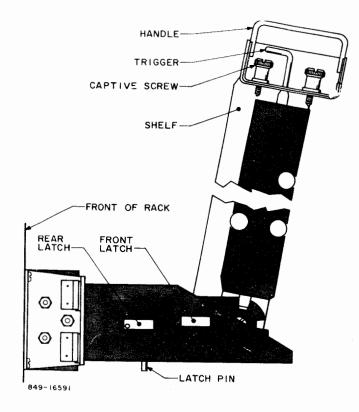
Side View of Shelf Showing Slide Mechanism
